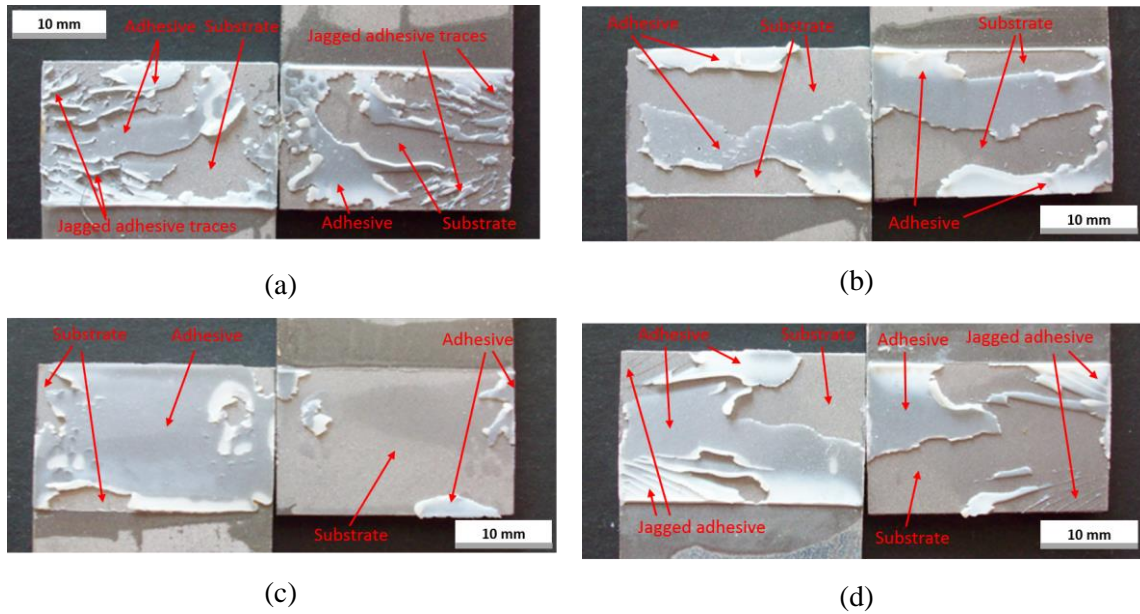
Photographs showing details of fracture surface of stainless steel SLJs pre-treated with grit blasting and subjected to different ageing methods: (a) unaged; (b) method(A); (c) method (B); (d) method (C)
